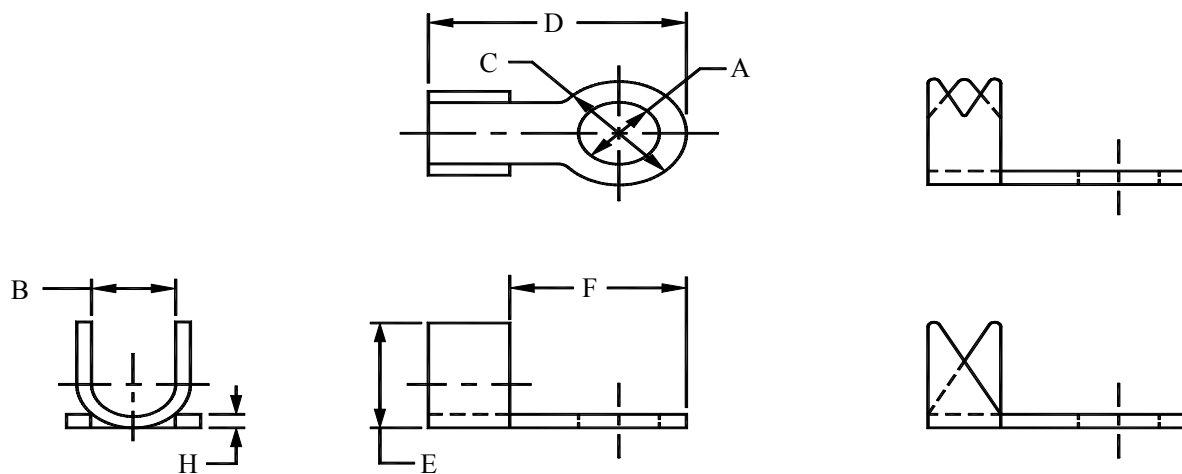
Terminal dimensions for -1 through -13 and -27.
